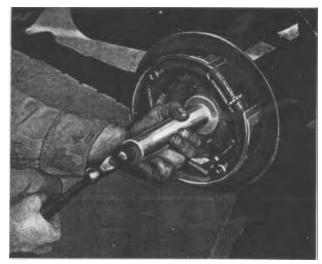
Installing Axle Shaft Oil Seal Assemblies— J-353-2 Oil Seal Replacer
